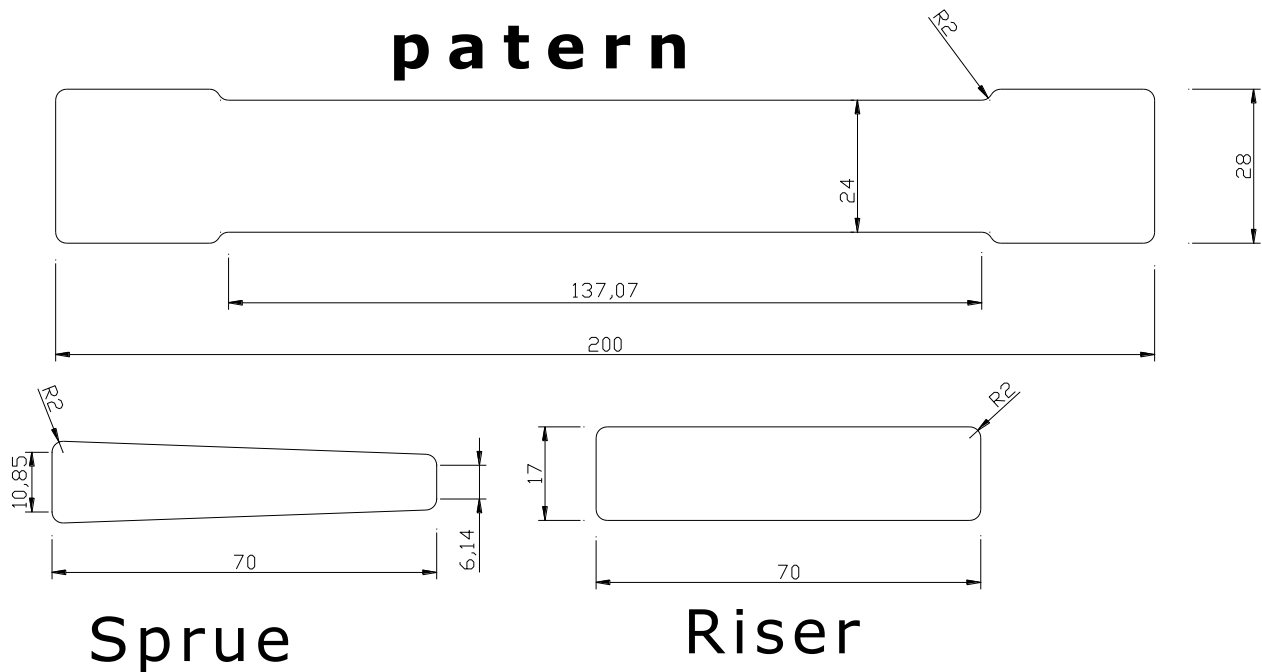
AutoCAD 2-D design of pattern, sprue, and riser
